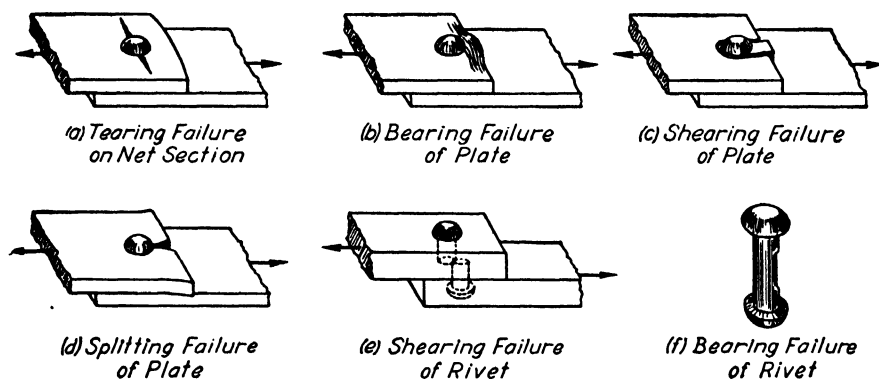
FAILURES OF RIVETED JOINTS.
